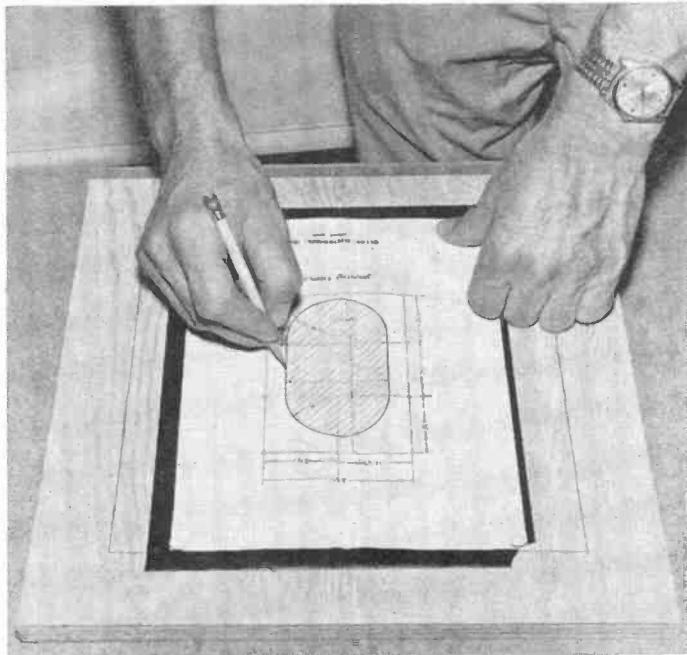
Provided with crossover network is template that determines dimensions of cut-out on bottom of enclosure. Use carbon paper to transfer dimensions to bottom plate.
